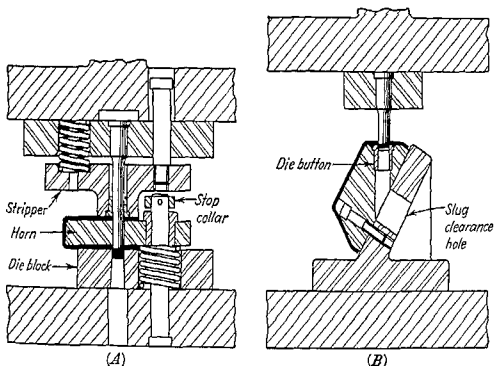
Horn dies (A) piercing opposite holes in shell with one punch in one press stroke; (B) piercing irregularly shaped shells.⁷
